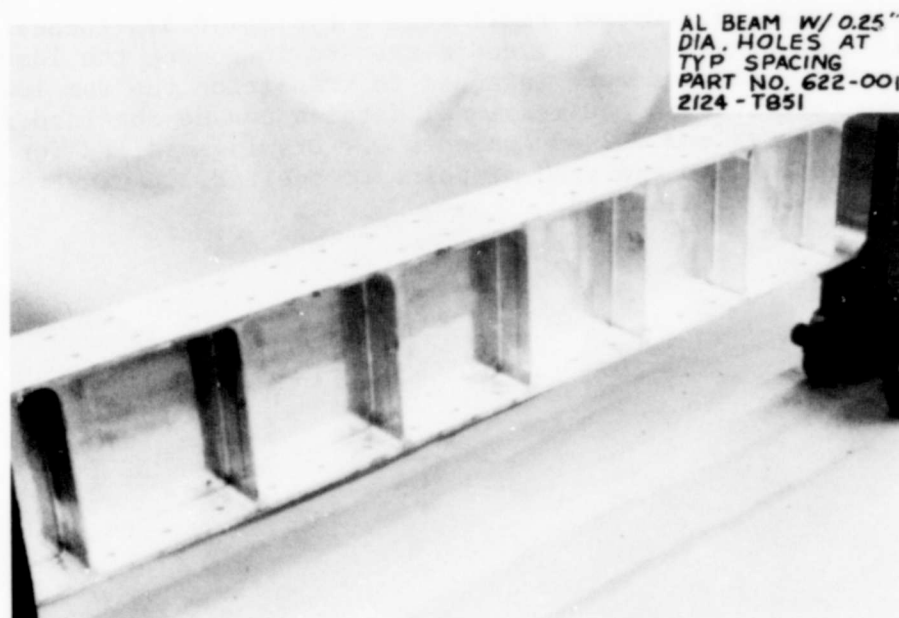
ALUMINUM I-BEAM WITH 1/4" FASTENER HOLES
